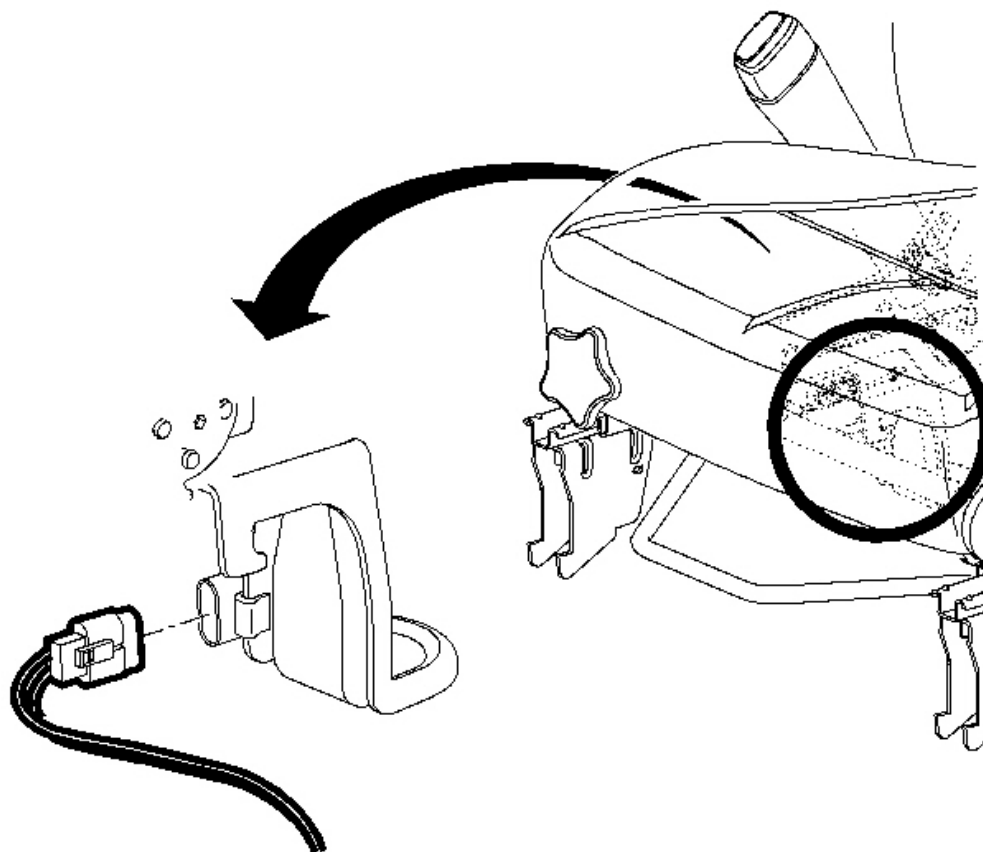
Disconnecting/Connecting Heat Module Electrical Connector
